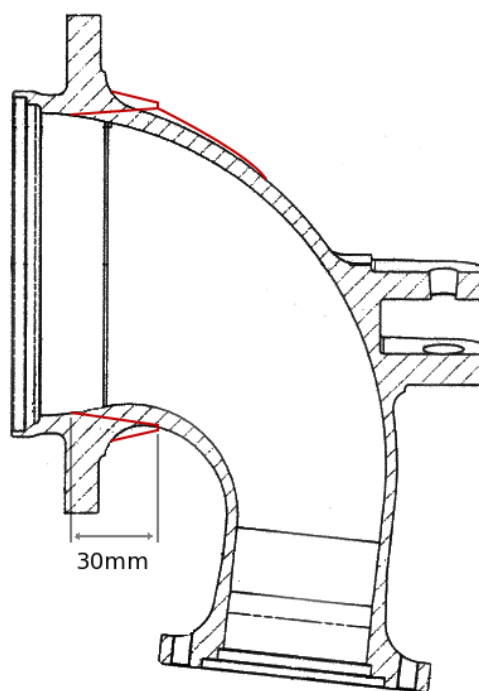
Cross sectional drawing of the TED with a suggested flange geometry added in red.
